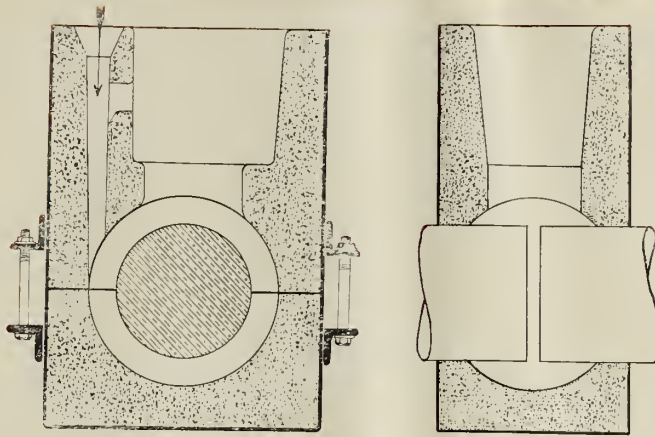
MOLD FOR REPAIRING BROKEN SHAFTS
